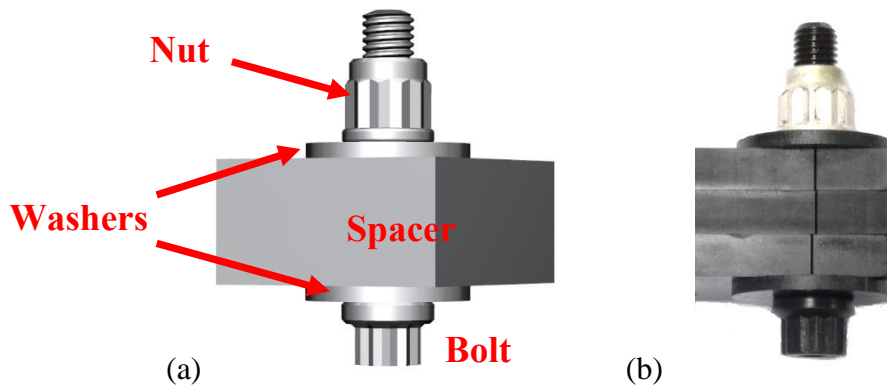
Thermal Ageing Test Assembly a) Schematic and b) Real Joint Tested
